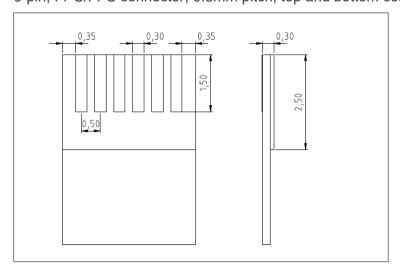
Recommended FPC/FFC dimensions (mm).
